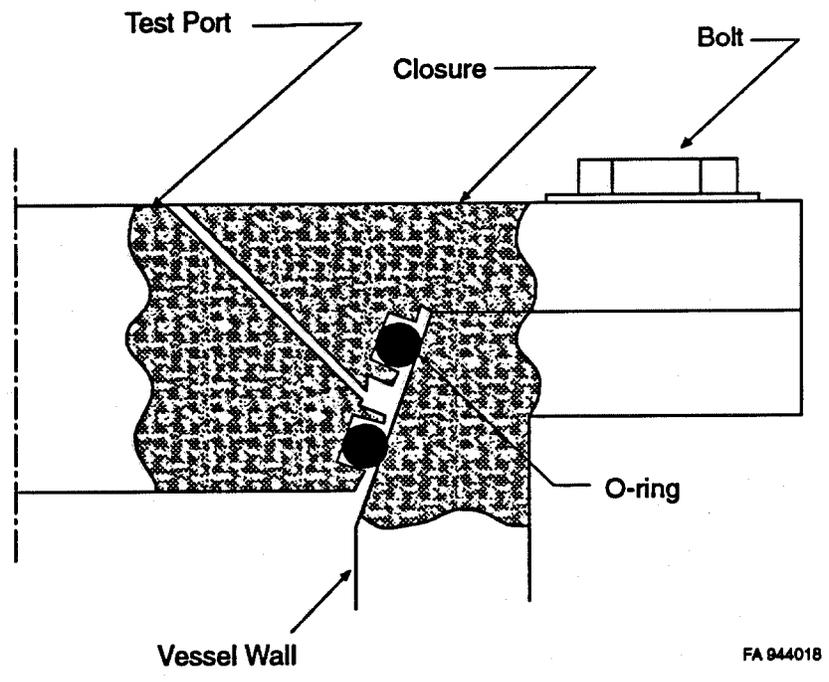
Typical plug seal design with double O-ring configuration.
